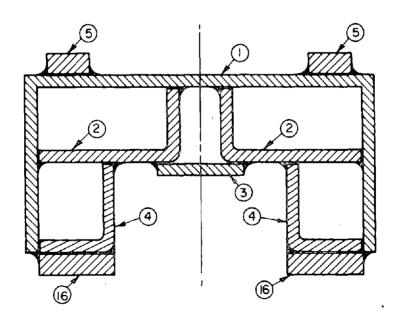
LOAD CELL TIE CROSS SECTION WITH ADDED ELEMENTS
